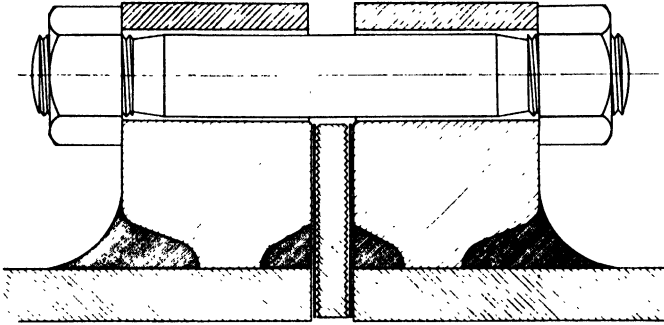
SERRATED RING JOINT WITH WELDED FLANGES
